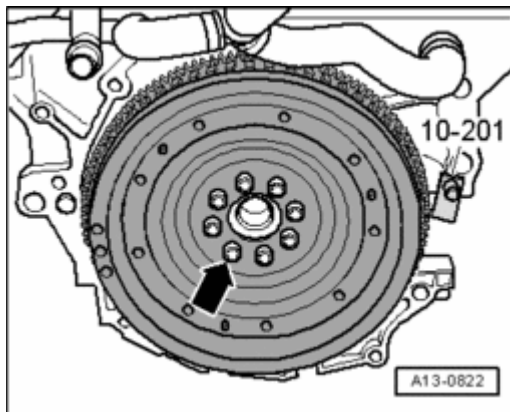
Removing Bolts And Flywheel Using Counterhold Tool 10 - 201
